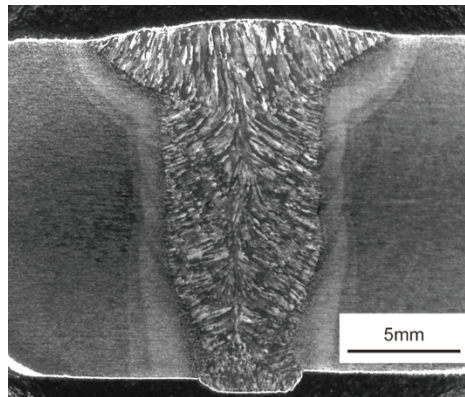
Optical macro-photograph for weld specimen (B-15)
